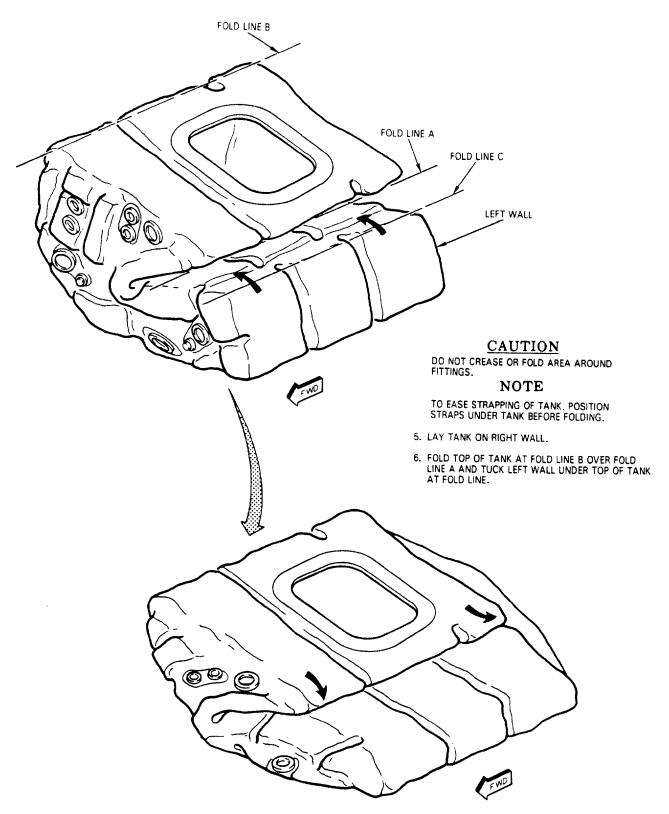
Installation - No. 2 Fuel Tank Folding (Sheet 2)
